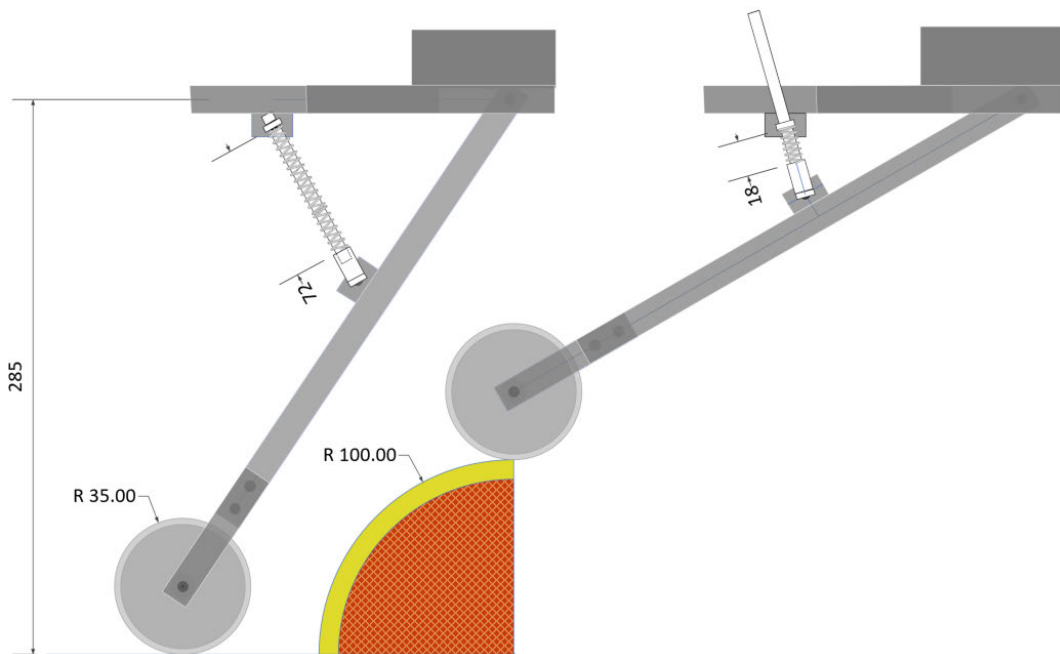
Drawing Package Dimensions to Verify Spring Compression Range
